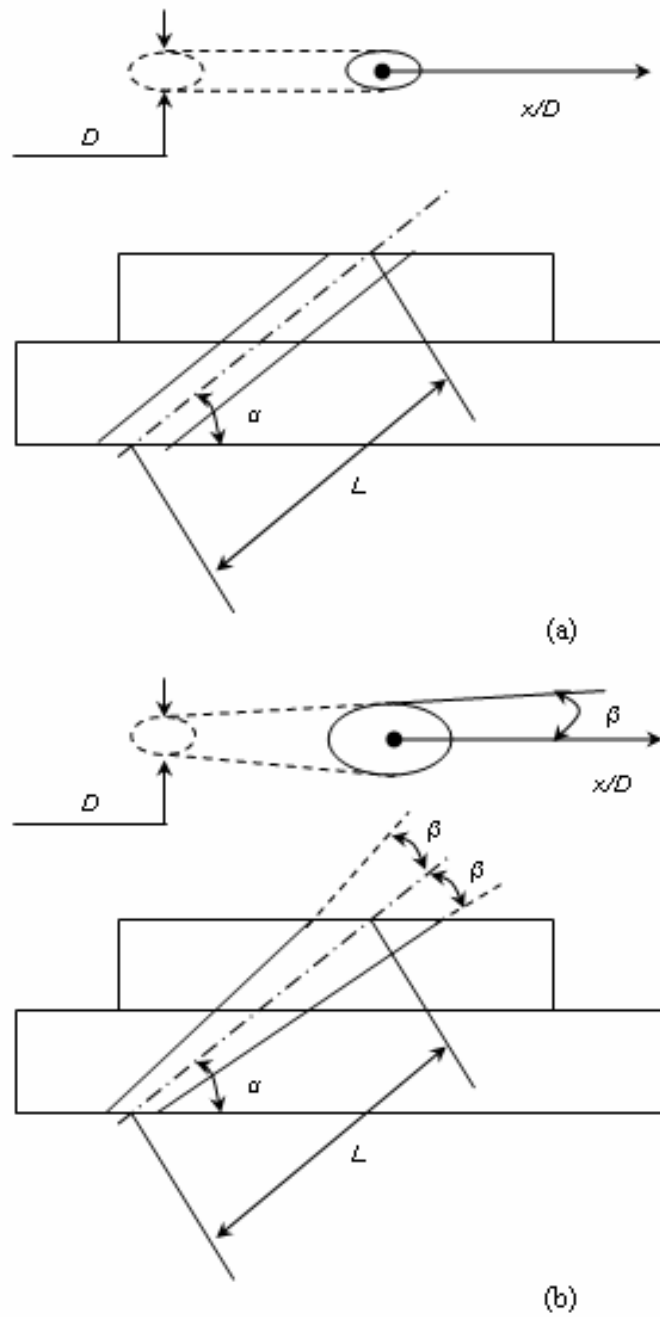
Coupons used in the experiment: (a) cylindrical-shaped hole and (b) conical-shaped hole
